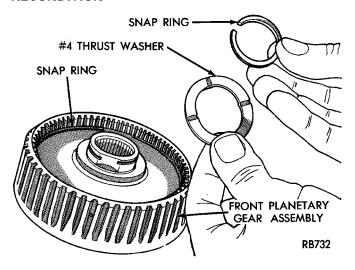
Front Planetary Gear Snap Ring and No. 4 Thrust Washer (Always Install a New Snap Ring)
